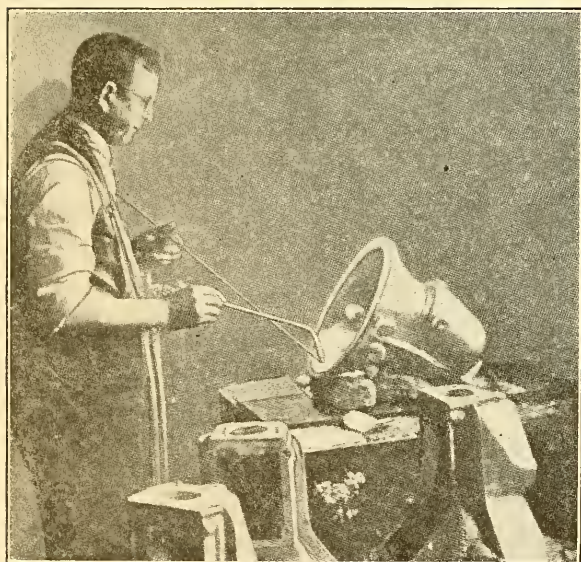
Filling Blowholes in an Aluminum Gear Case.
